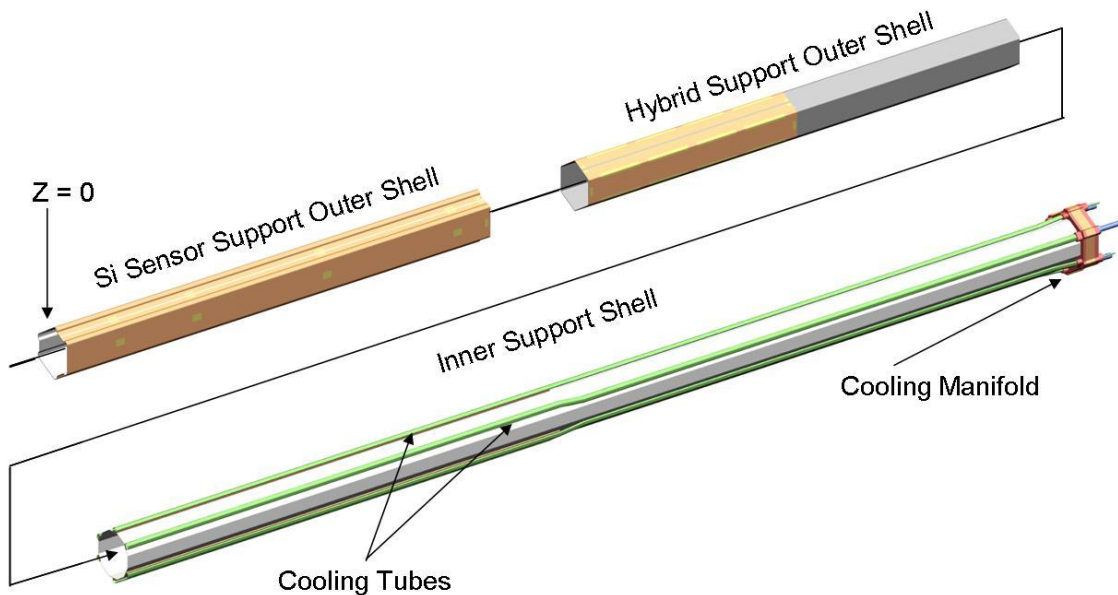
Exploded view of L0 shell assembly. Half-structure shown.
